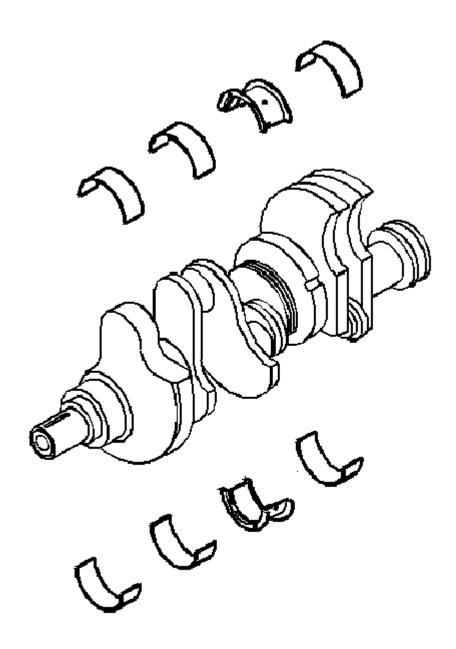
View Of Crankshaft & Bearings Courtesy of GENERAL MOTORS CORP.
